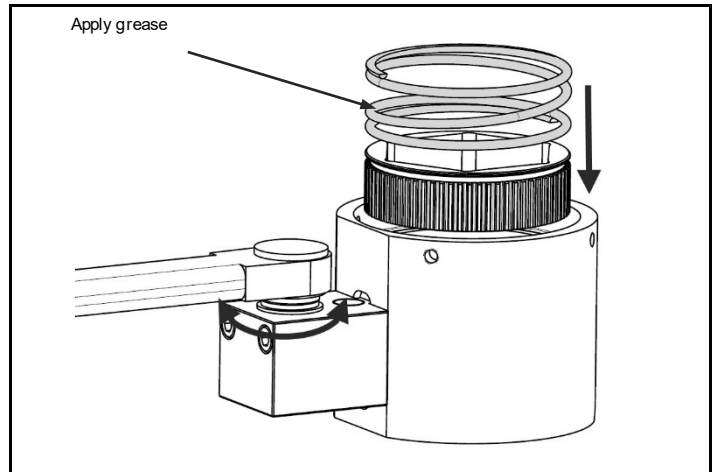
Apply grease, insert geared socket followed by compression springs
